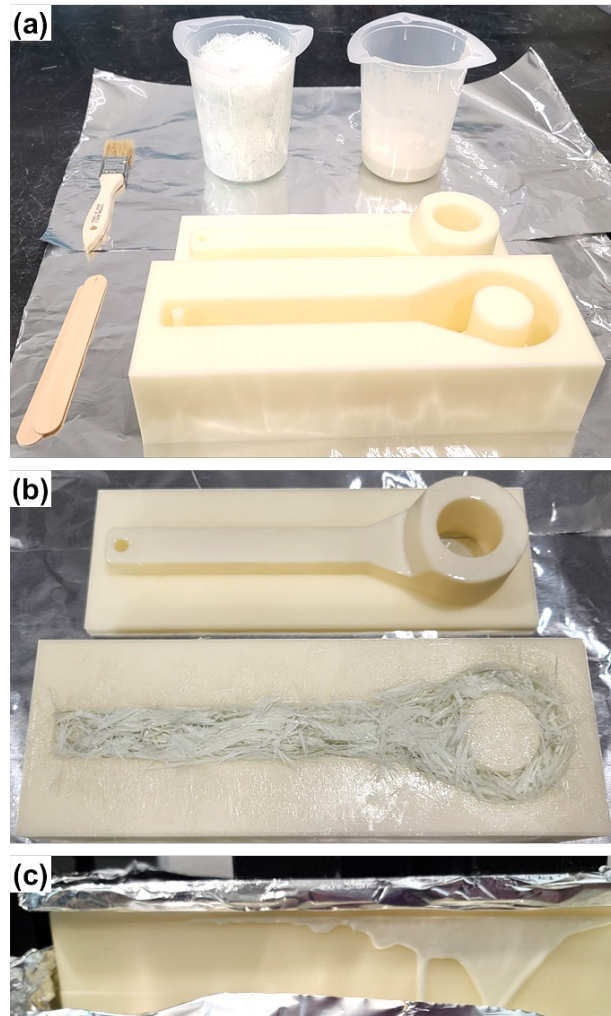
Fabrication of the wrench: (a) both mold parts along with pre-weighted fibers and mixed epoxy, (b) male tool with a coating of epoxy and the female tool hand packed with wetted fibers, and (c) fully closed mold with excess epoxy leaking from the interface between the mold pieces.
